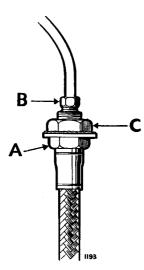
Flexible hose connection. Hold hexagon 'A' with spanner when removing or refitting locknut 'C.'
